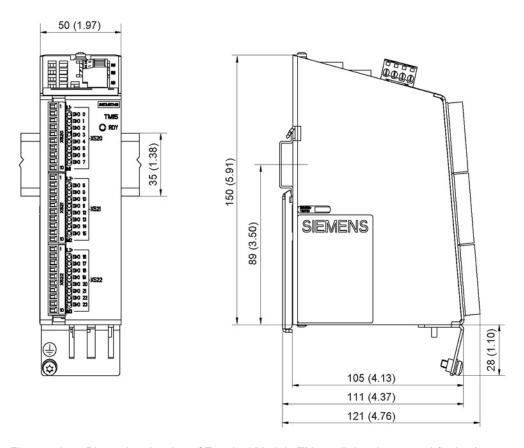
Dimension drawing of Terminal Module TM15, all data in mm and (inches)
